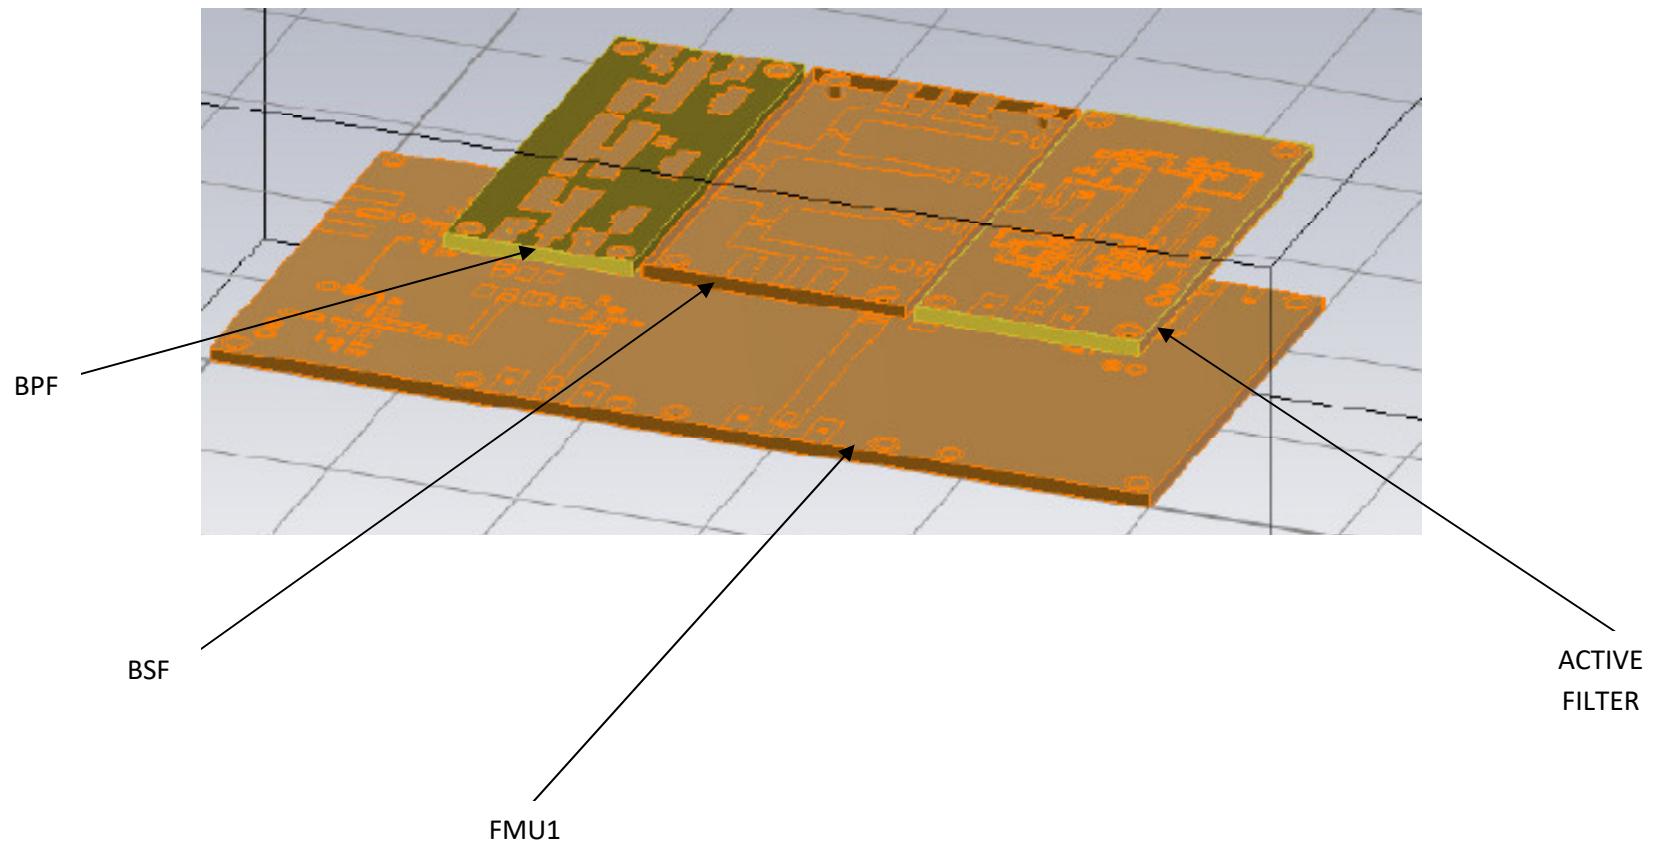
Mechanical Layout of the RFMU Unit; the FMU1 as a mother board
